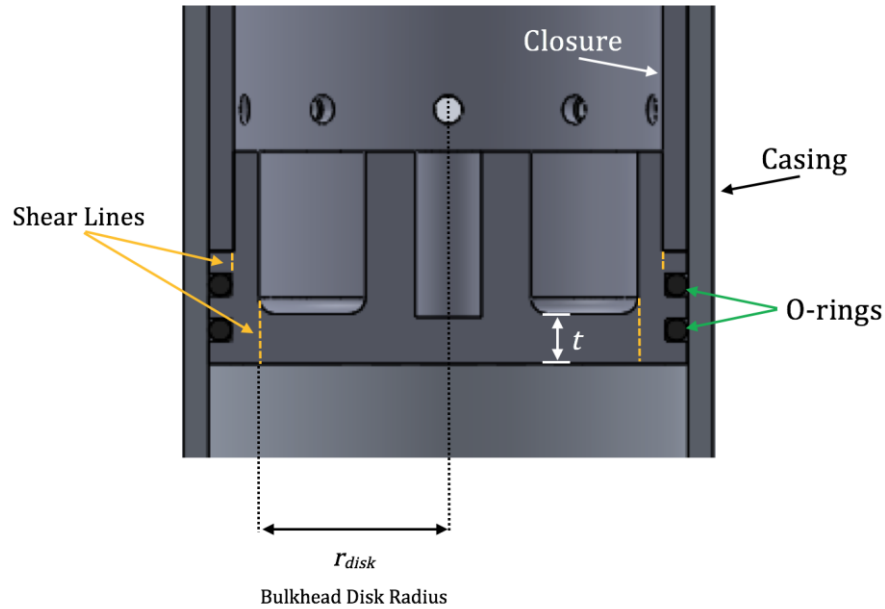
Cross-section view of a forward bulkhead with separate closure, showing disk radius and shear line locations.
